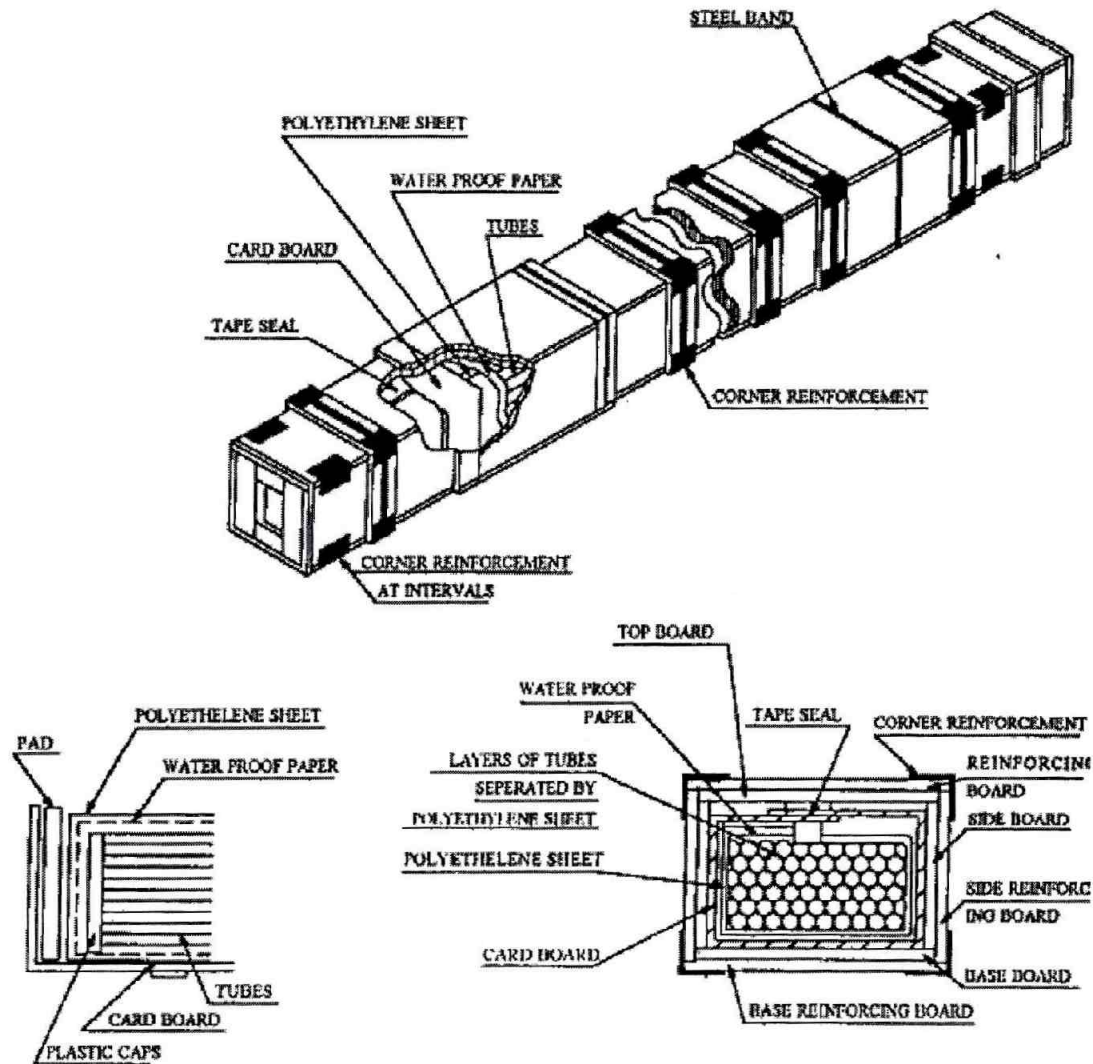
TYPICAL PACKING OF HEAT EXCHANGER TUBES
